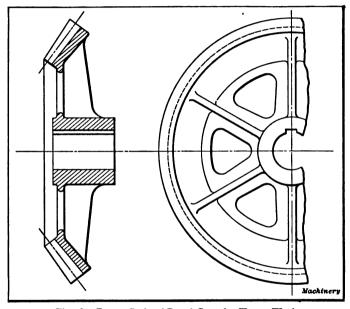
T-arm Style of Bevel Gear for Heavy Work
